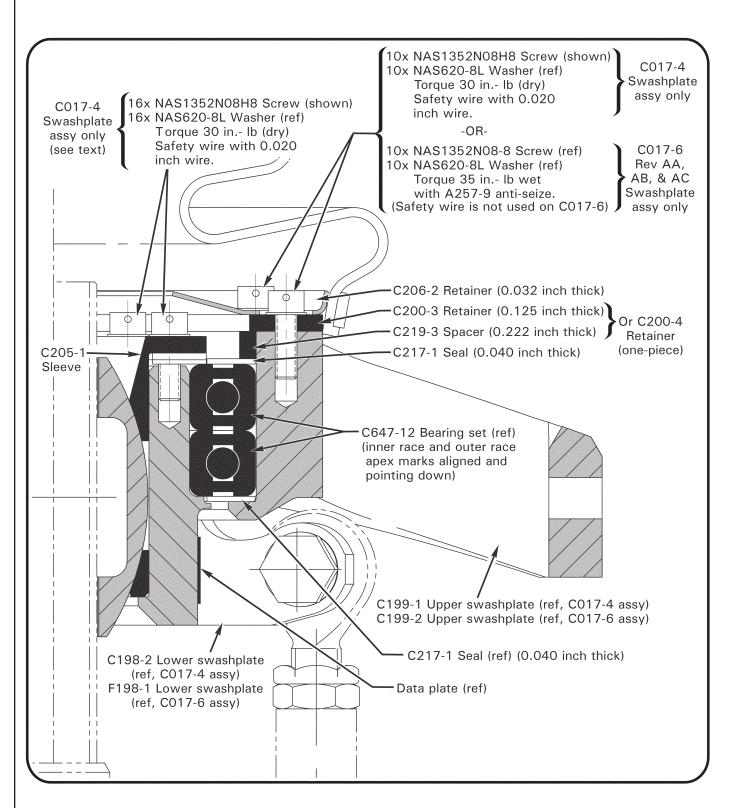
B C017-4 SWASHPLATE ASSEMBLY, AND C017-6 REV AA, AB, & AC SWASHPLATE ASSEMBLY, APPROVED B900-13 MODIFICATION
